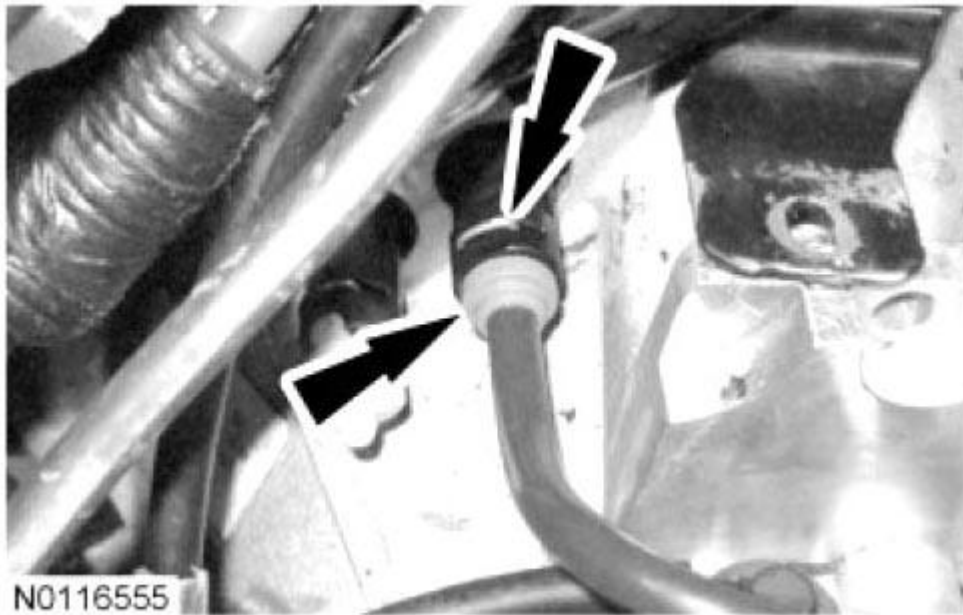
Locating Clip And Clutch Hydraulic Hose
